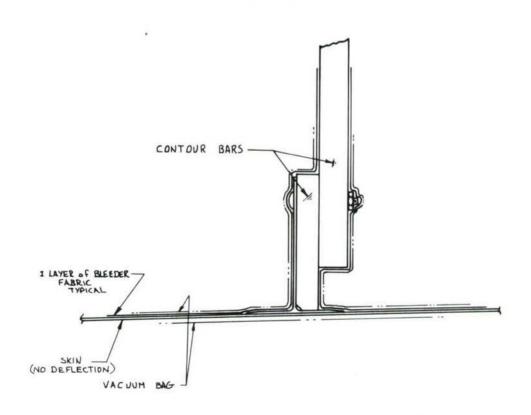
ONE LAYER OF GLASS FABRIC BLEEDER
